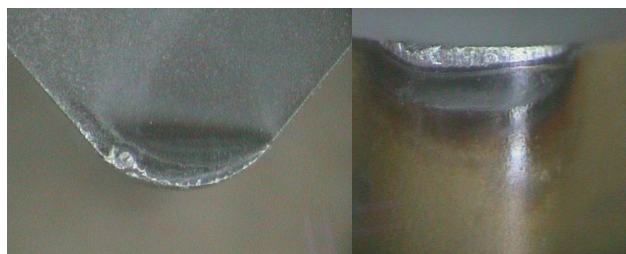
Tool wear on insert KR 3205 when rough turning ADI G3.
